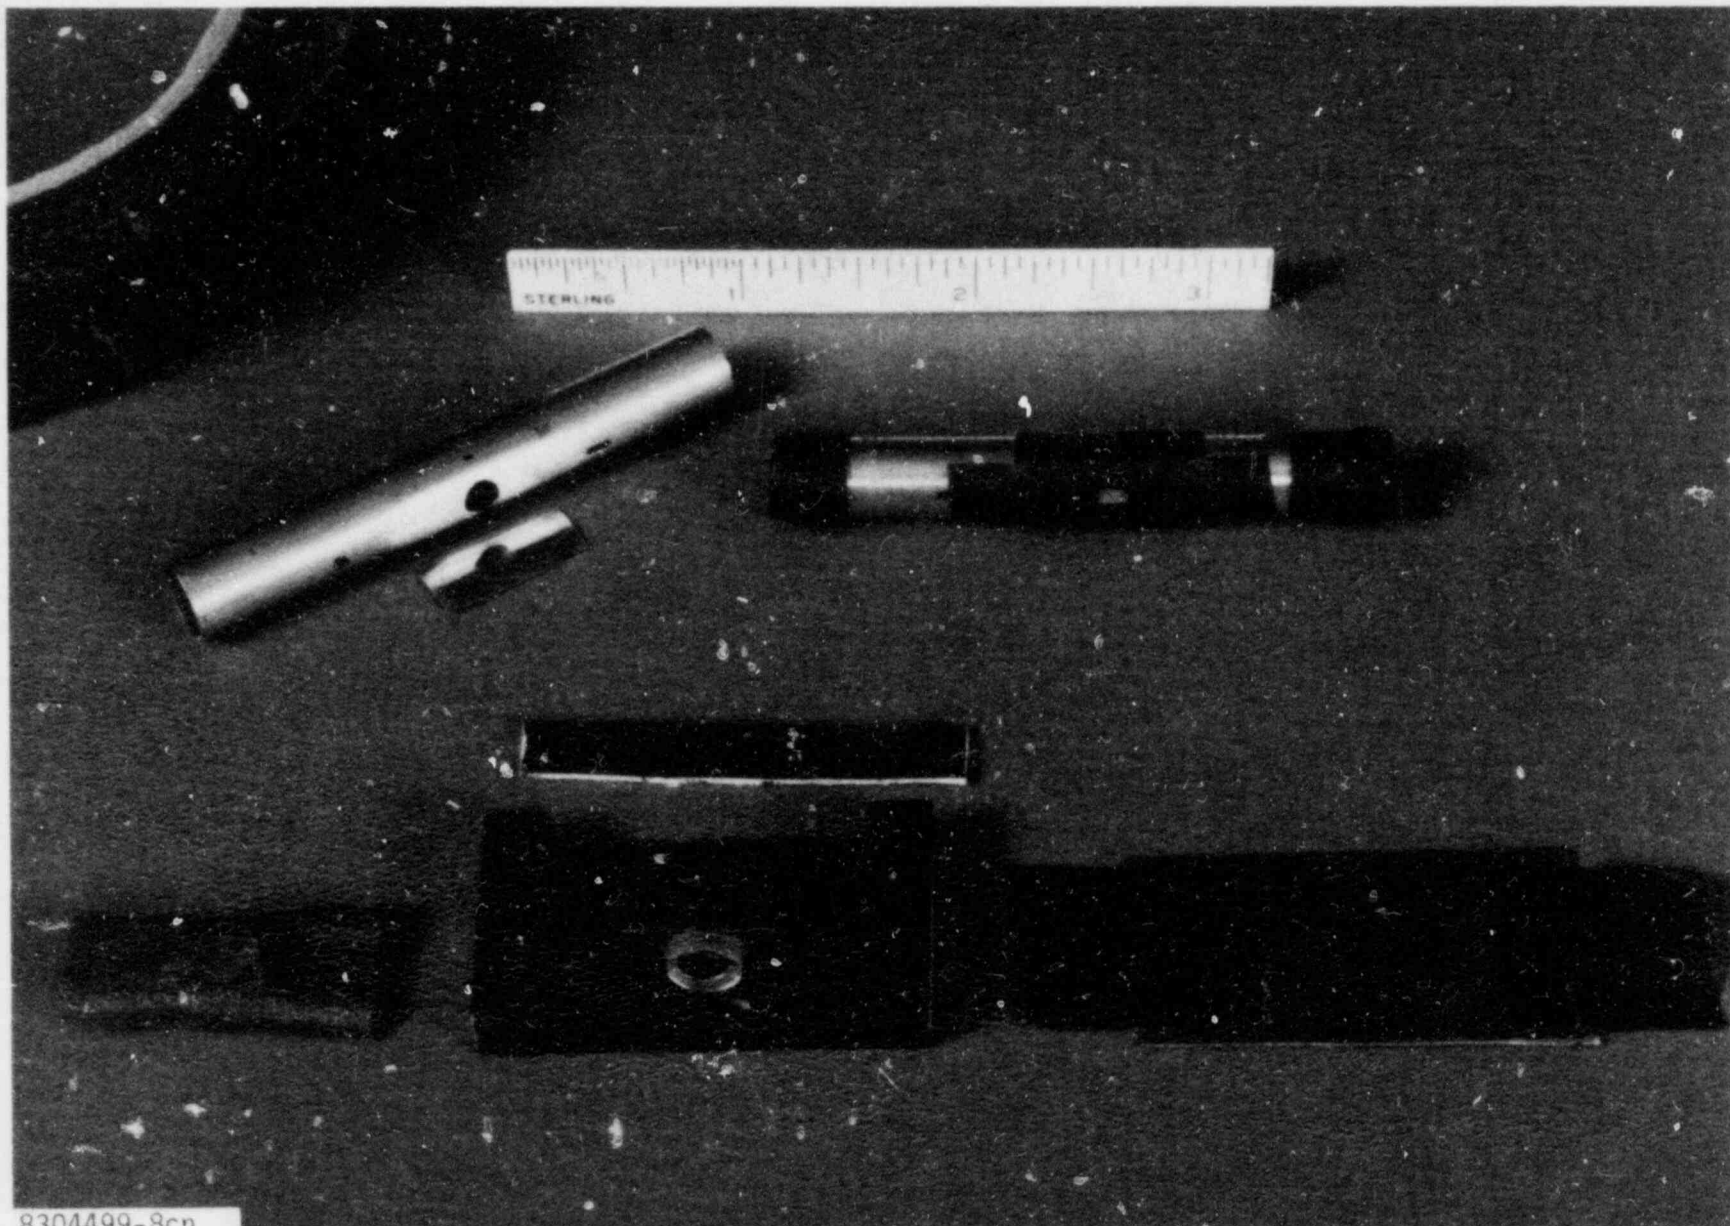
Tube Lane Camera in Milled Aluminum Box With Cover Removed
